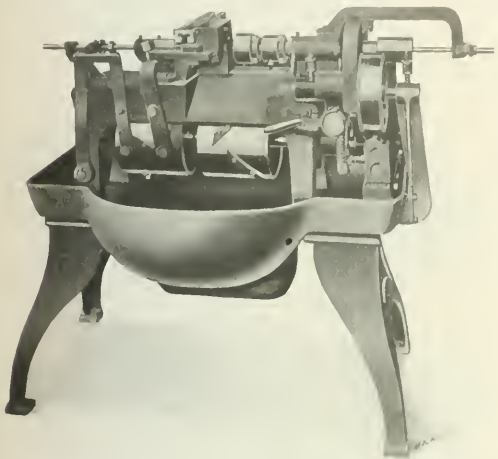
National-Acme Size No. 1, Style TM Stud Threading Machine
